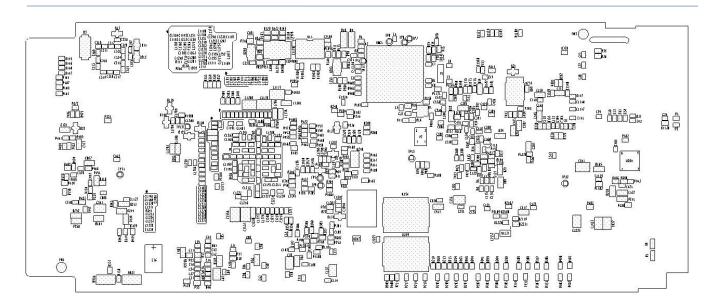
C6657 Lite EVM Board layout - Bottom view
